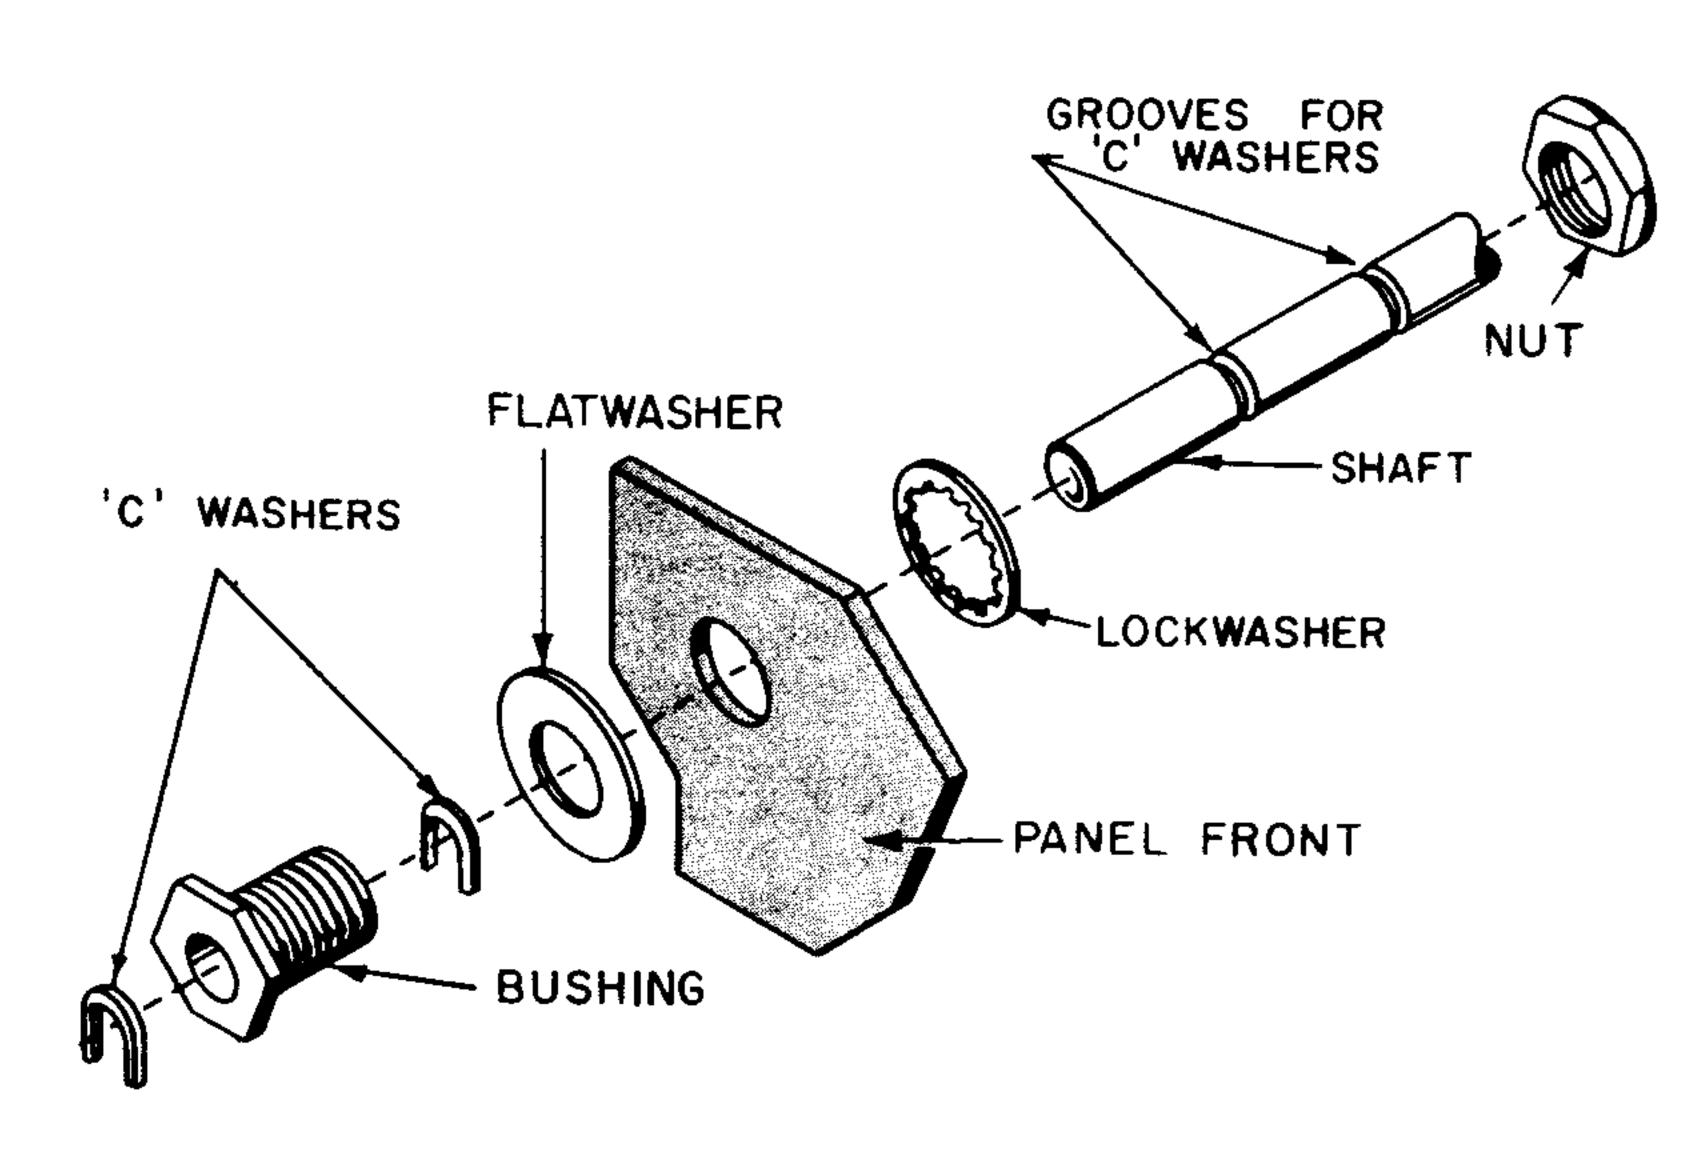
ANTENNA CONTROL ASSEMBLY
